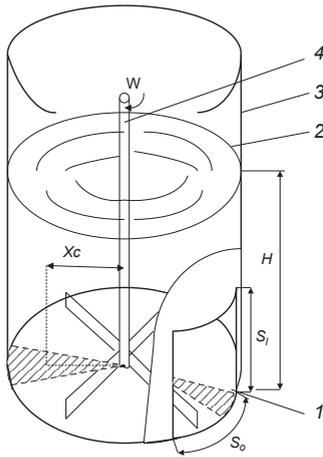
Layout of dimensions when unloading materials from the mixer tank: 1 - discharge hole; 2 - top layer of material; 3 - mixer capacity; 4 - rotating shaft with a mixer
